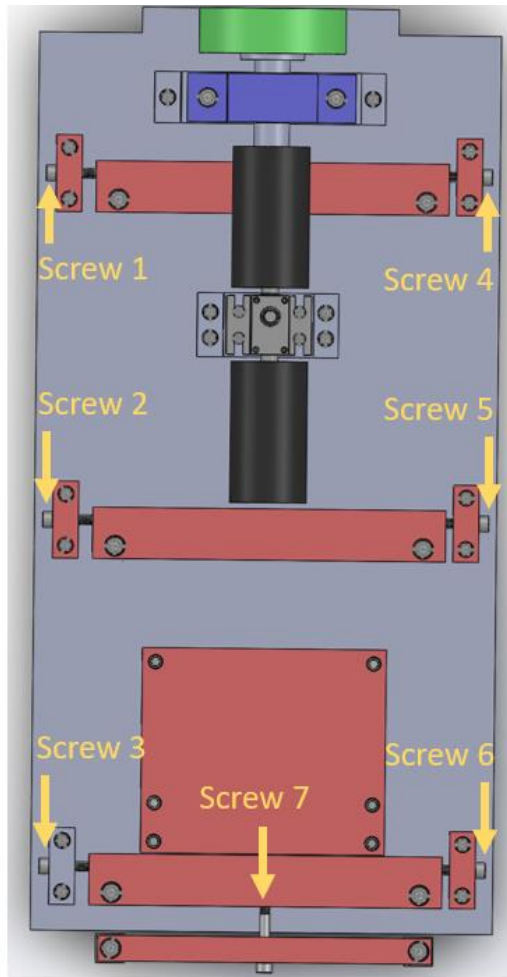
Testbed Aerial View with Labeled Adjustment Screws.
